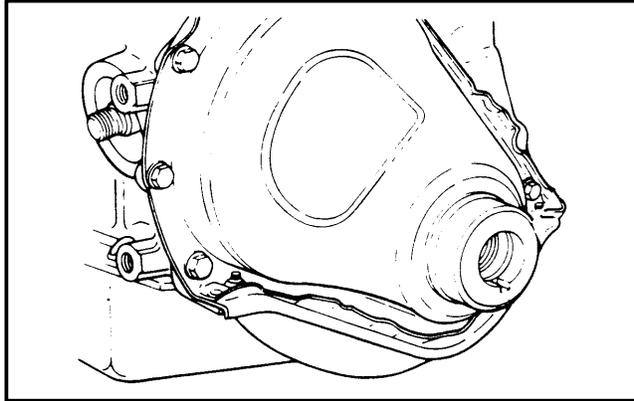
CENTERING TOOL, TIMING GEAR COVER
